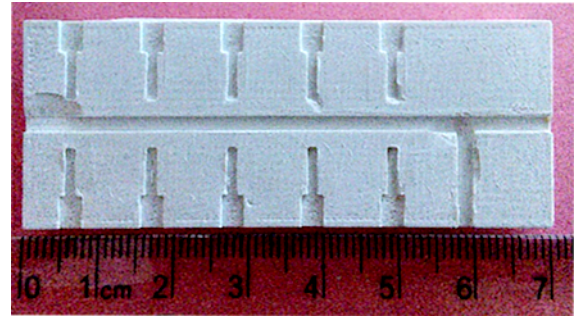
Structured green body manufactured via injection moulding using an ABS mould insert.
